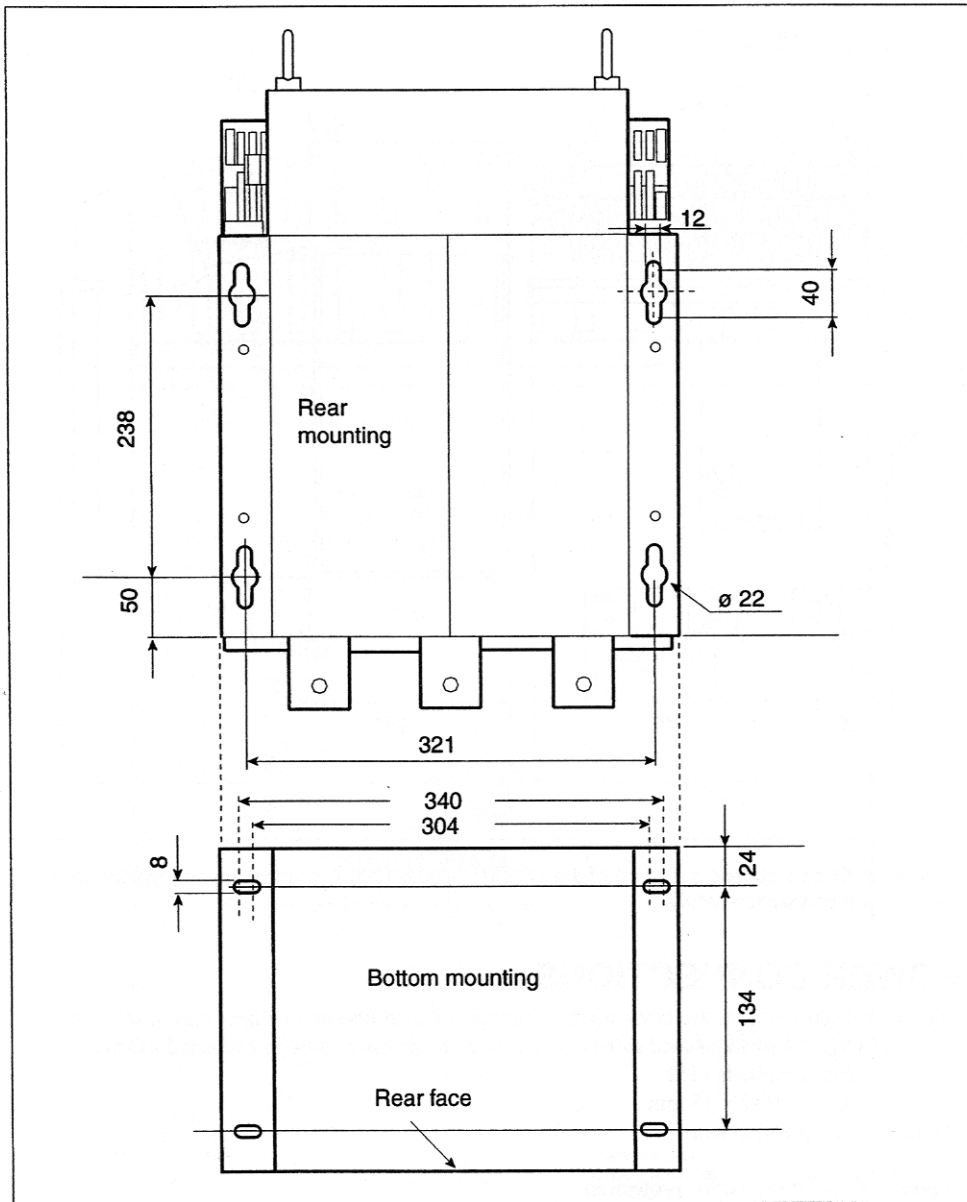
Mounting details (in mm) for the 700A and 1000A rated TC3001 units
